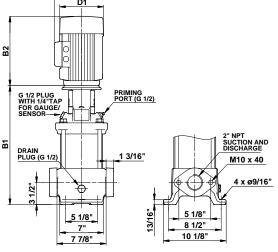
Dimensional sketch of CRF 10-1, 10-2
